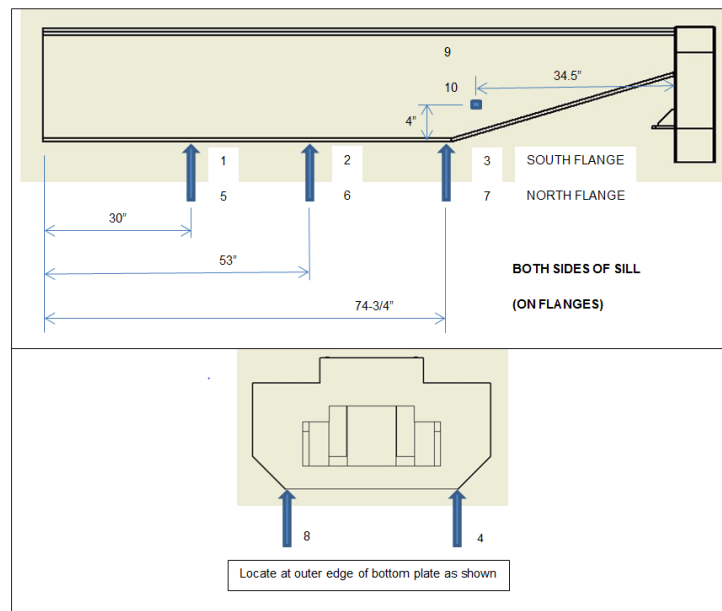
Displacement Sensors on Draft Sill – Coupler/Draft Sill System Test
